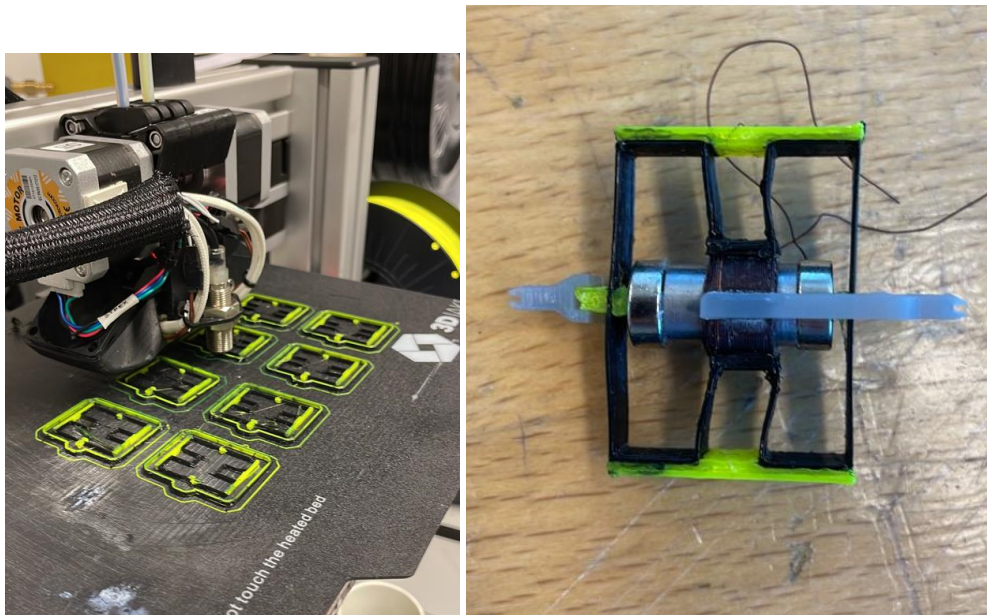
Manufacturing process for the actuator Flexure and the final assembly of the actuator.
